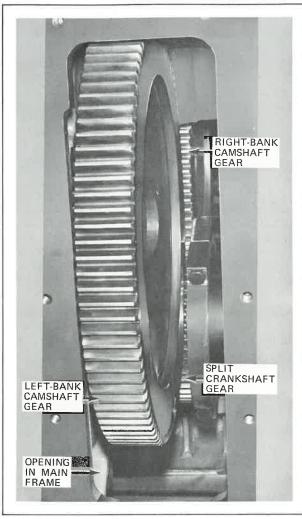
CHECKING REAR GEAR TRAIN.
